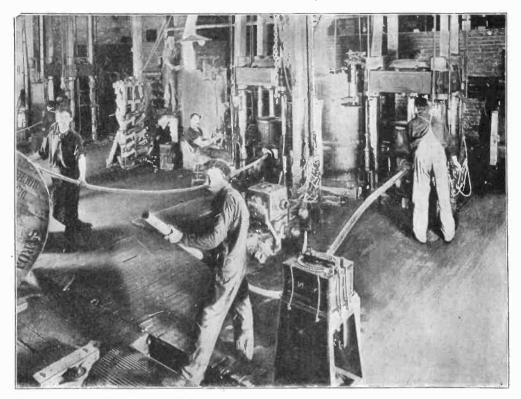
FINISHED CABLE COMING OUT OF THE LEAD PRESSES. THE LEAD JACKET IS SMOOTH AND CYLINDRICAL, WITHOUT A SEAM
